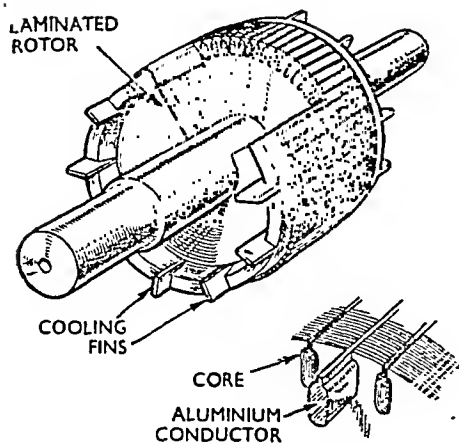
Cut-away view of squirrel-cage rotor in which rotor bars, end-rings and cooling fins are of aluminium alloy cast in one piece. There are no joints and the rotor is virtually indestructible.
